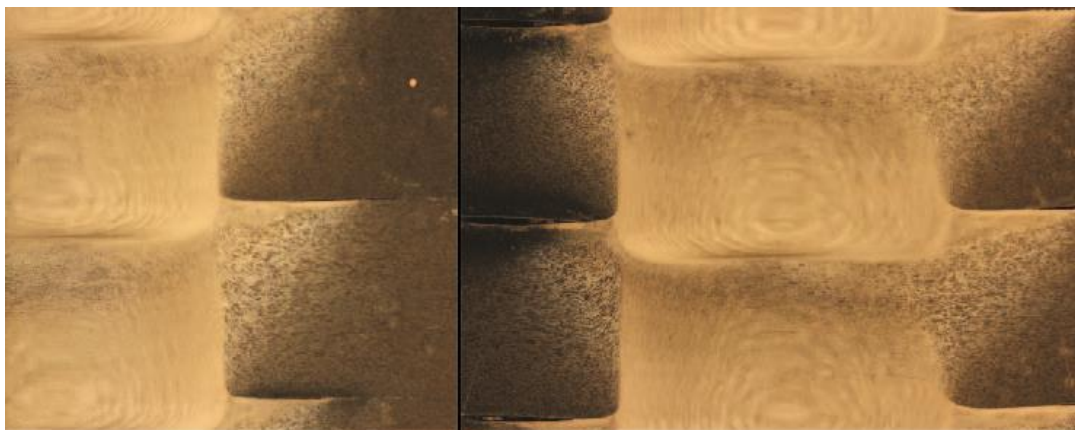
The representative images taken of the eight weld of both the start and end polished sample of post weld heat treated 2219-T87
